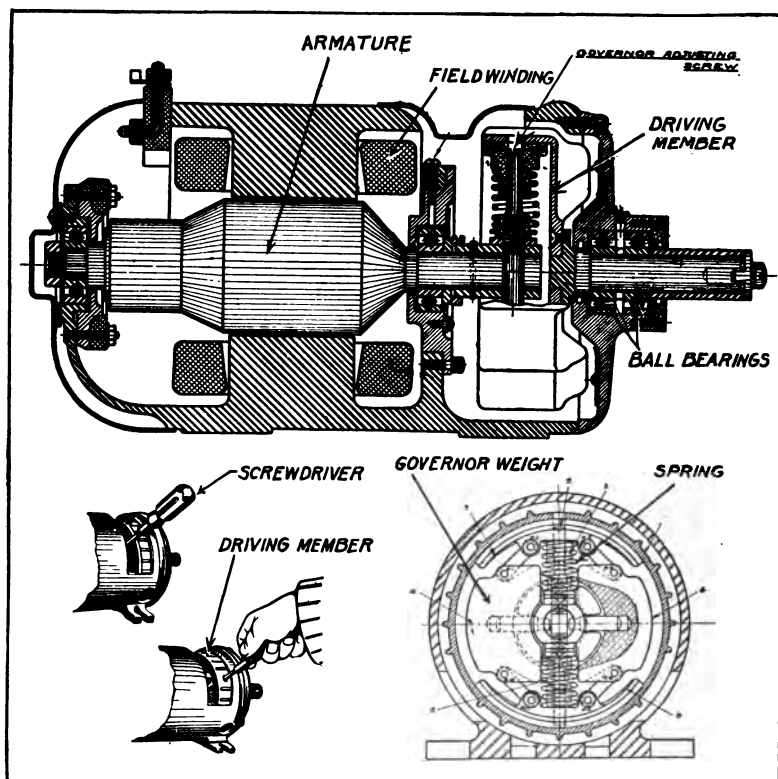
Sectional View of Latest Pattern, Gray & Davis Governed Dynamo, Showing Construction of Governor and Method of Adjusting.
